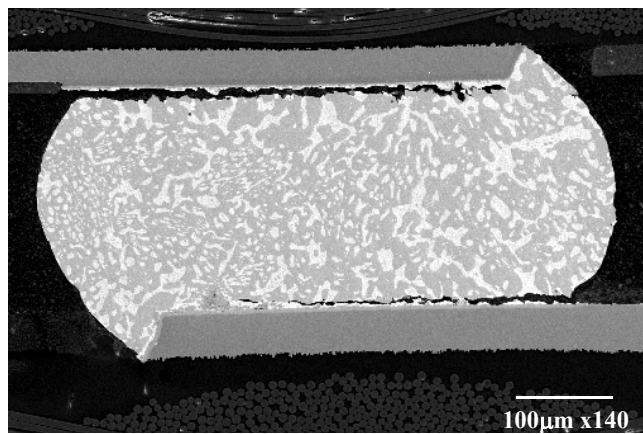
Simultaneous Crack Propagation Top and Bottom of the Solder Joint, 15 mm BGA, V1.
